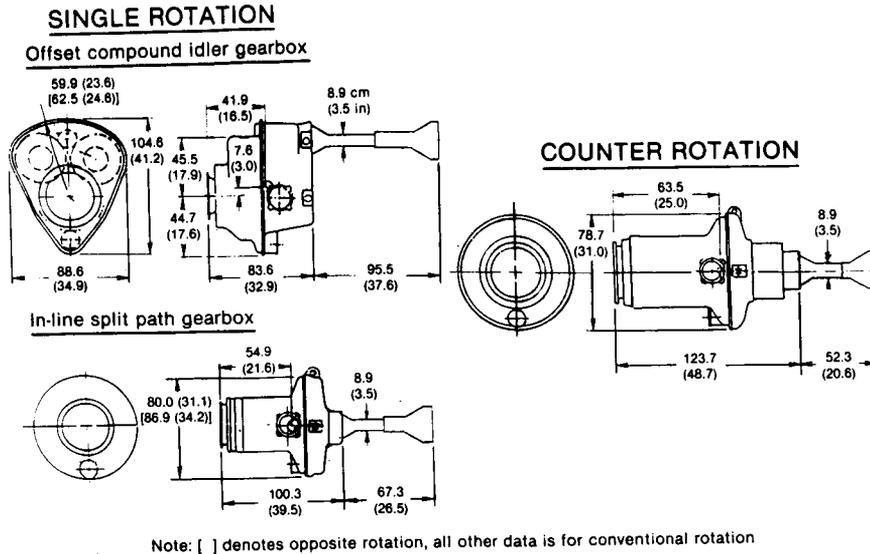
Base Size Gearbox Dimensions - Information is presented for both single and counter rotation gearboxes. (J27638-33)
